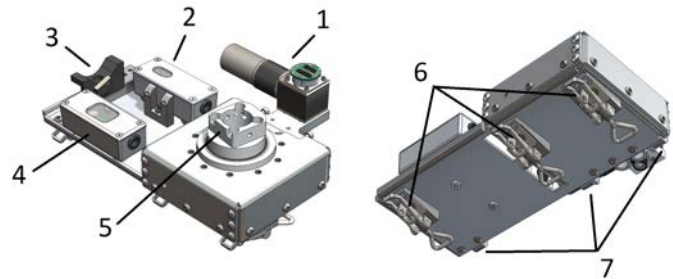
Overview of components for the base sub-assembly of the robotic arm (1) The motor that drives the base. IG-32, 721:1, 10 RPM right angle gear motor with RMB30SI 13-bit absolute magnetic rotary encoder mounted to output (2) Base motor controller PCB in its protective housing. (3) Stowing rest. Holds the limb in stow position. Includes a trigger switch used to indicate when the arm has reached stowed position. (4) Arm controller PCB in its protective housing. (5) Mount for limb. It is hollow to allow all wires for the limb and end effectors to rout through the pivot point to protect the wires and reduce strain. (6) Toggle latches, used to secure the arm to the rover chassis. (7) These three rounded edges mate into features on the rover chassis when the toggle latches are engaged.
